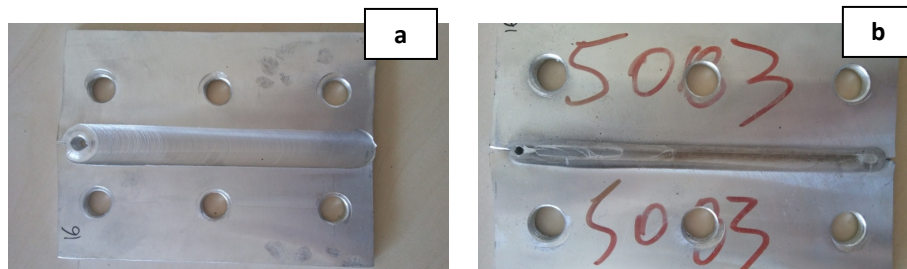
(a) Top and (b) bottom views of a similar weld AA5083-H 111
